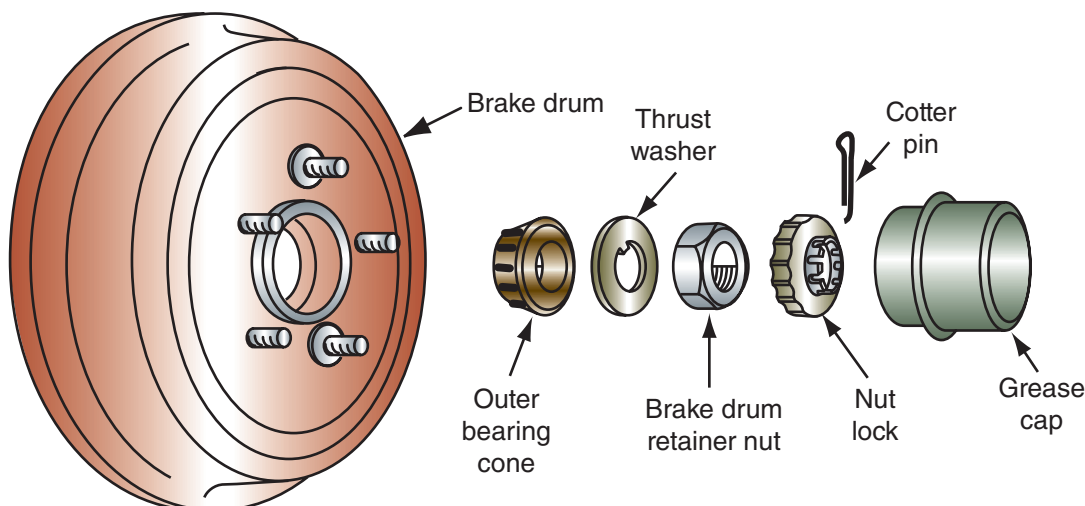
To remove a fixed drum assembly, remove the retaining nut and slide the assembly off with its bearings.
